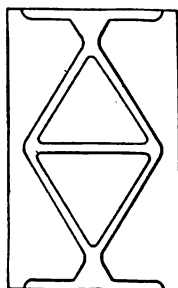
SEC. 7a.—Crosshead shoe oil groove. (Courtesy Power Plant Engineering.)
